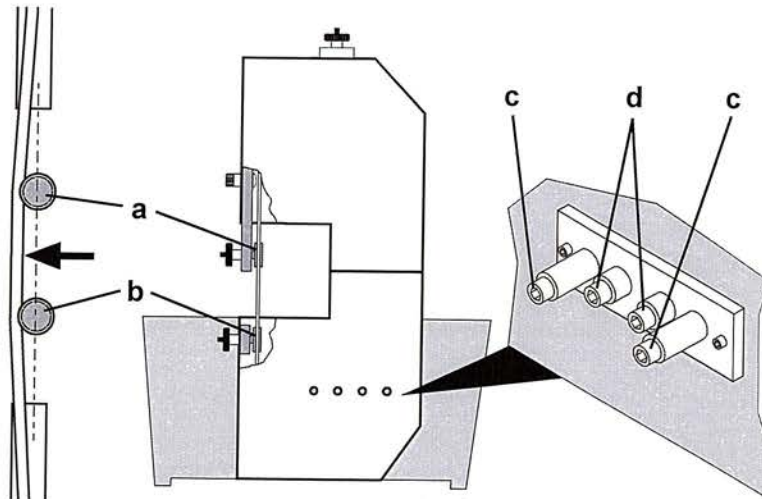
Adjusting the rear of the cutting band to support rollers EXAKT 310/311
